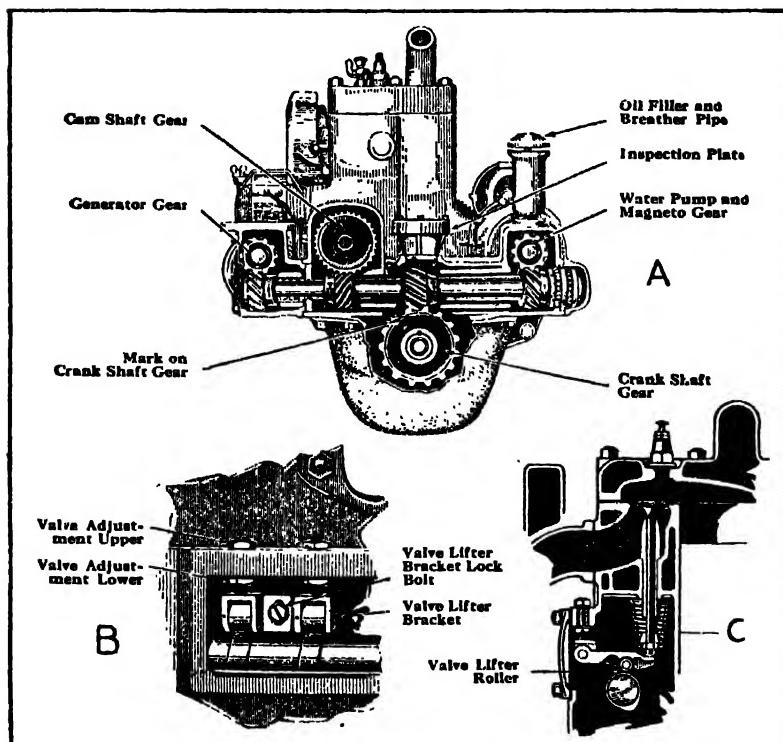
Method of Timing Valves of Overland Six Cylinder Motor and Adjusting Valve Gear.
